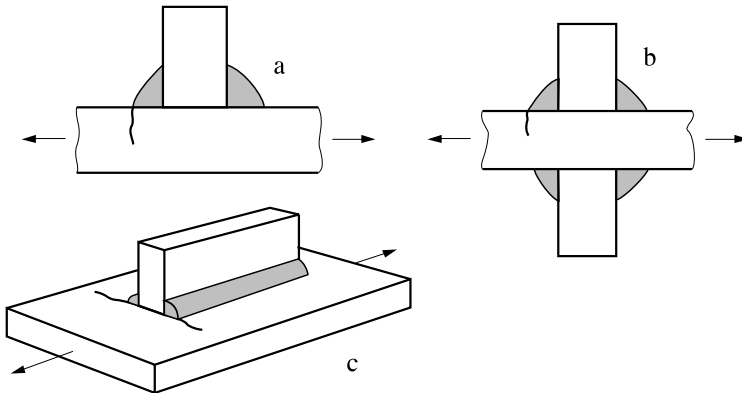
Fatigue cracking of a non-load carrying fillet weld
